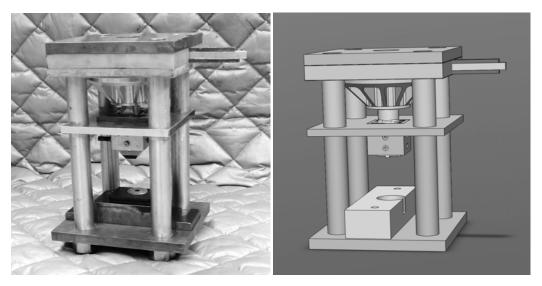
Actual embodiment of the high-speed press and 3-D CAD rendering.
